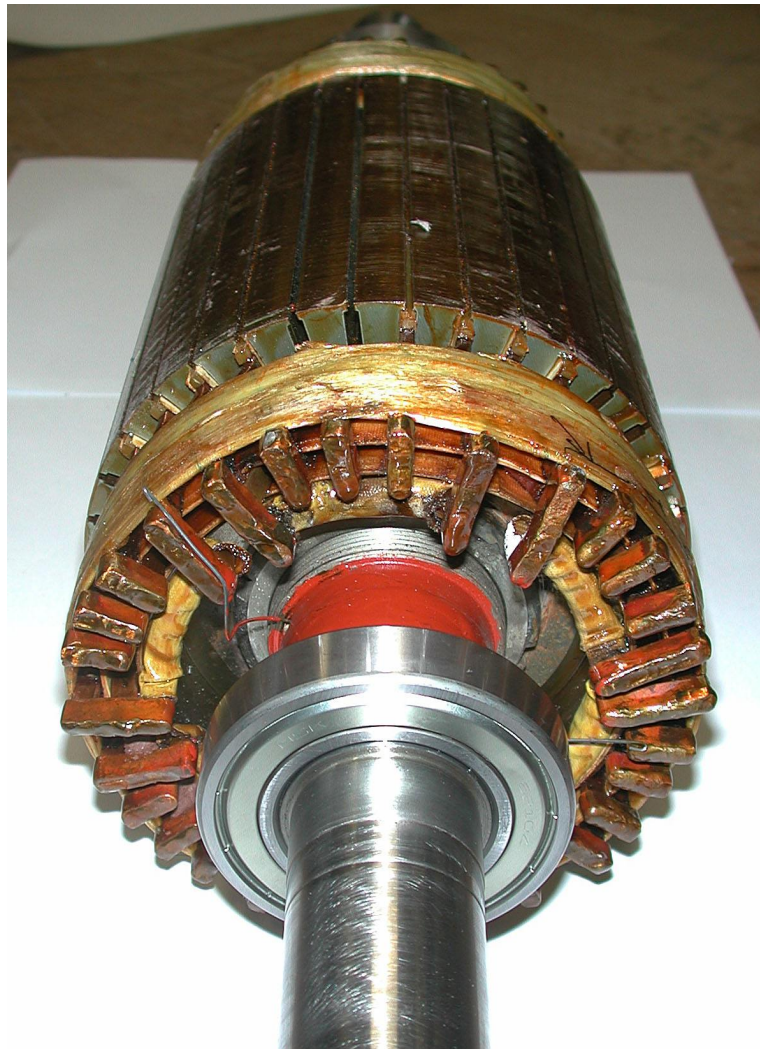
Prototype new double-layer design rotor, rotor 2
